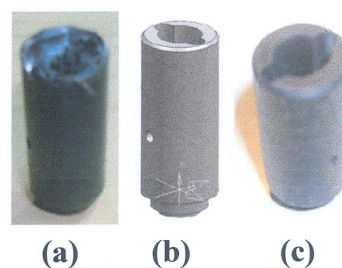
Tail Shaft Coupler (a) Damaged (b) CAD Model (c) Manufactured
